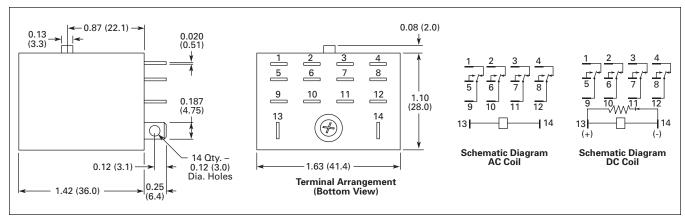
D7PR43 — Approximate Dimensions in Inches (mm)
